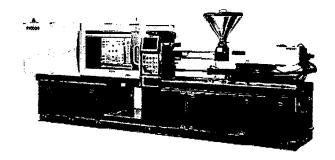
Injection Molding Machine; NISSEI MODEL
